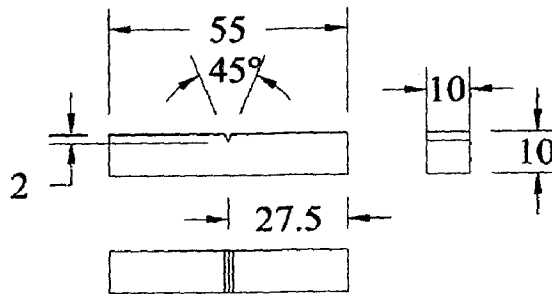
Schematic diagram of typical V-Notch Charpy test specimen
